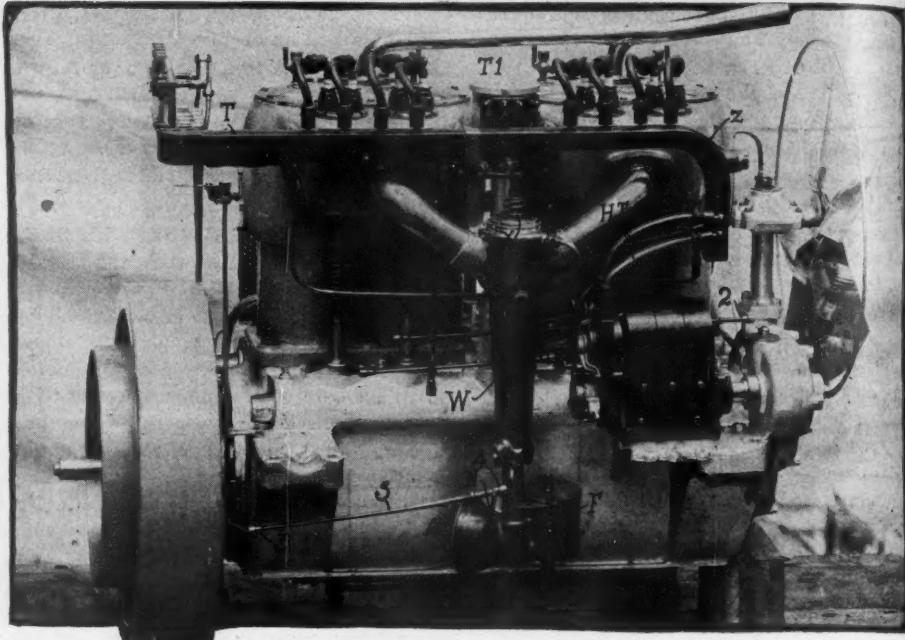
PEERLESS MOTOR SHOWING NEW CARBURETOR
